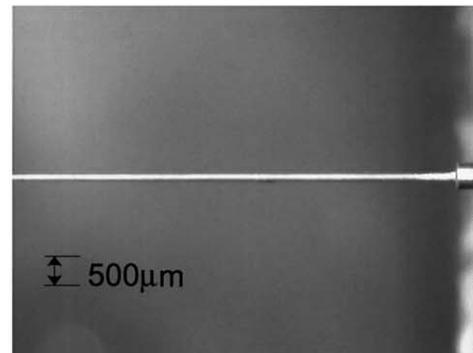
(d) is a typical surface condition of the tool–electrode which is machined by EDM using a running wire. This process is known as WEDG, and is being used widely for micro-EDM machining. Since a fresh wire is continuously used, the dimensional change of the sacrificial electrode is theoretically zero. This fact ensures high-accuracy dimensional control in micro-EDM. However, the surface finishing efficiency is not as high as that of the rotating electrode method. This is due to the fact that the diameter
